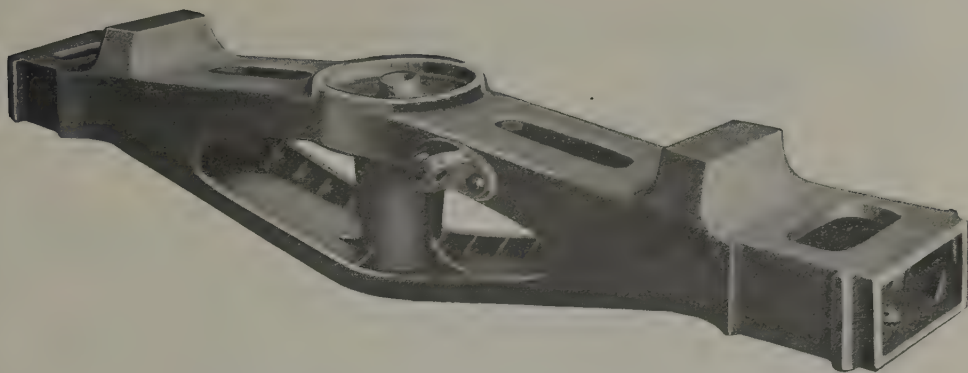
Buckeye Cast Steel Truck Bolster for Freight Cars. Buckeye Steel Castings Company.
